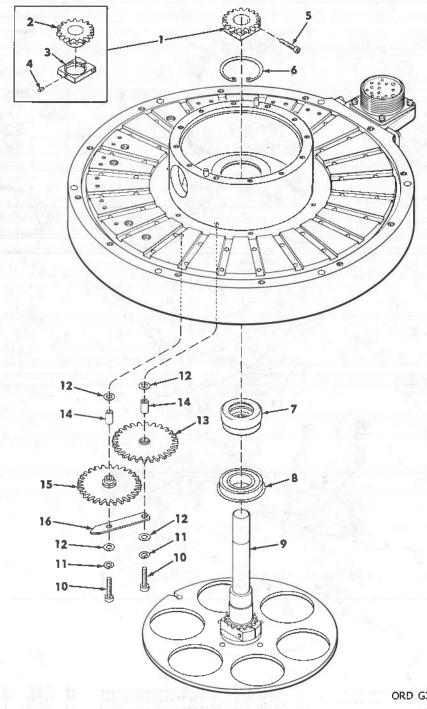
TRANSMITTER. COURSE DATA SUBASSEMBLY /9006523/-PARTIAL EXPLODED VIEW
